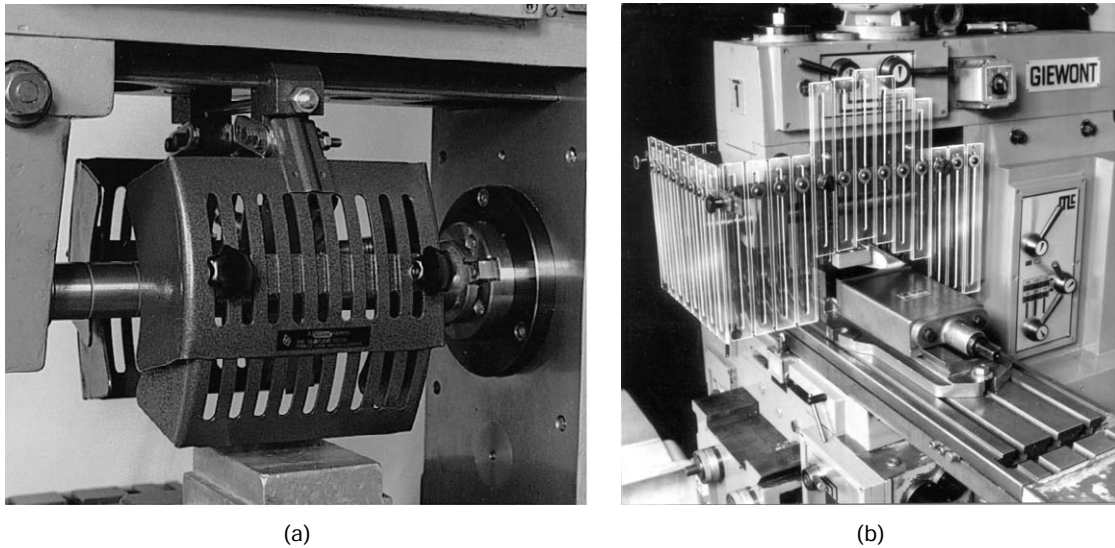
Milling machine guards: (a) toolroom type cutter guard; (b) production type cutter guard
